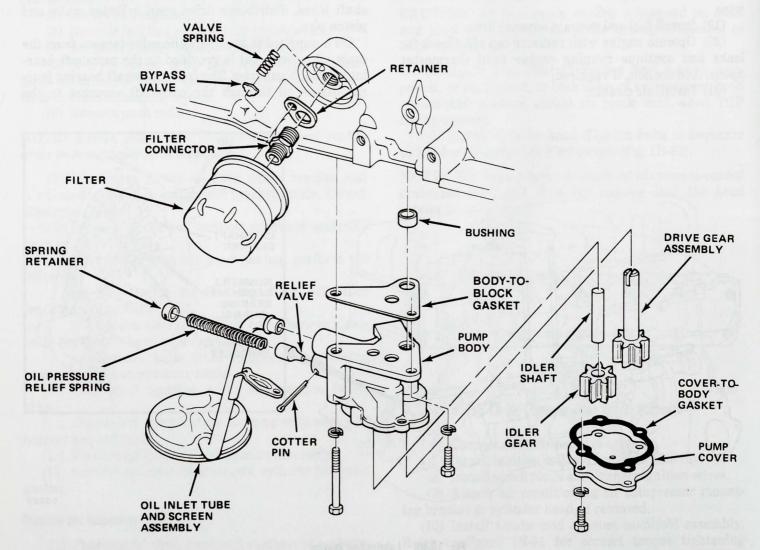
B-94 Oil Filter and Oil Pump Assembly
